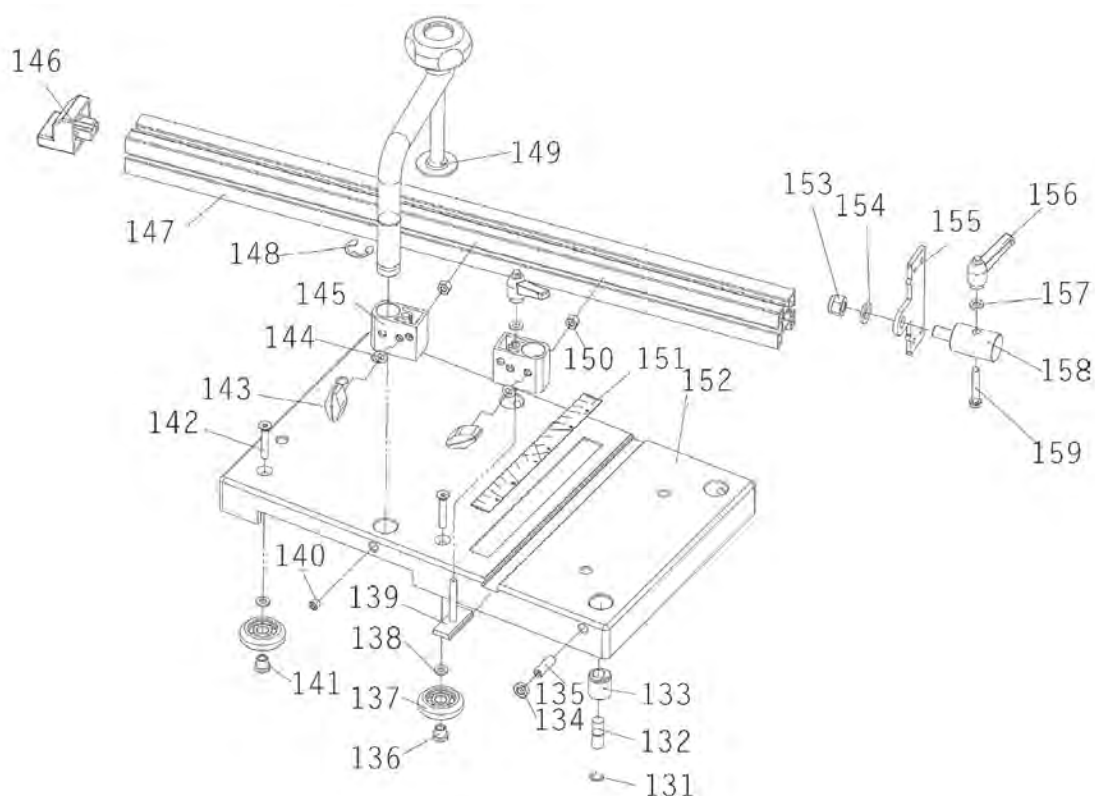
Spare parts Drawing 1 for TKS 254 PRO
